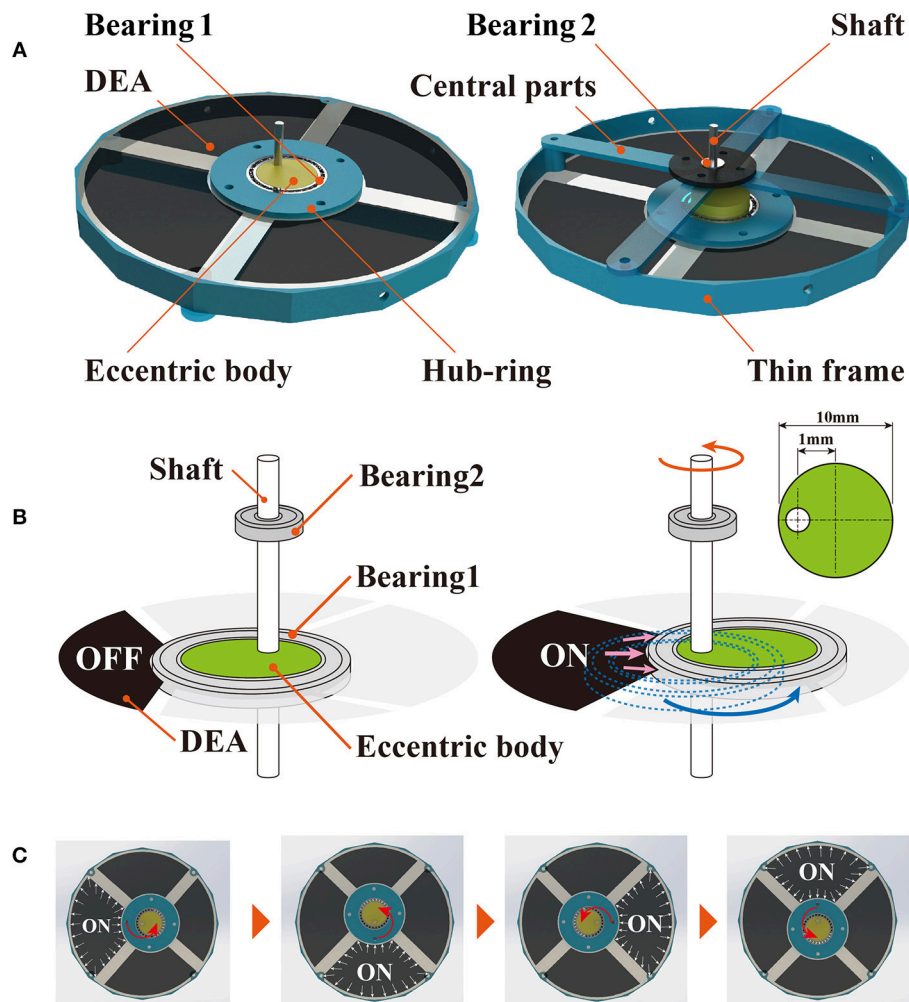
| Mechanisms of the deformable motor. (A) Crank mechanism consists of bearing 1, bearing 2, eccentric body, and shaft. DEAs are fixed by a thin frame and hub-ring. (B) Rotational mechanism of the deformable motor. The crank moves under the force generated by the DEA. (C) The crank mechanism is activated when the four DEAs are stretched in order.
